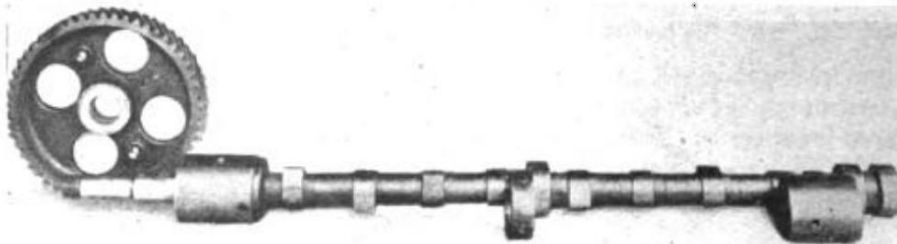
The Camshaft With Gear Removed and With Front Bushing on Shaft. The Center and Expansion Plug Bushings Are Shown Displaced But in Center.
